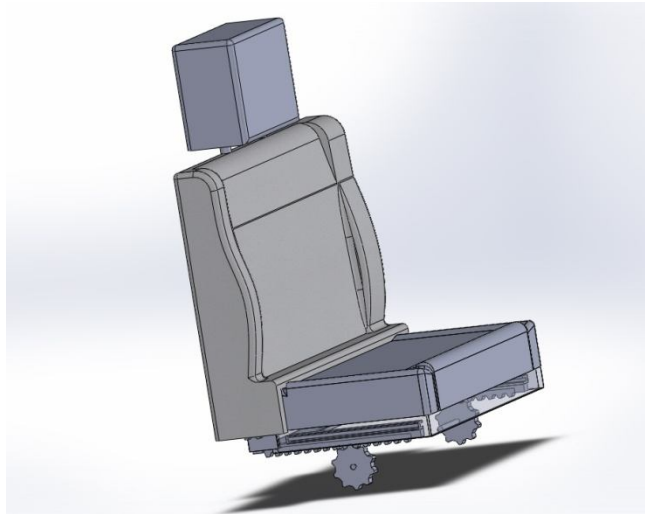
A final seat assembly representing the seat with rack and pinion attachments at the bottom.
